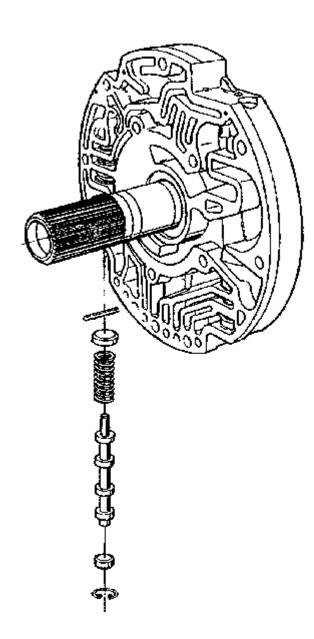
View Of TCC Valve Assembly Courtesy of GENERAL MOTORS CORP.
